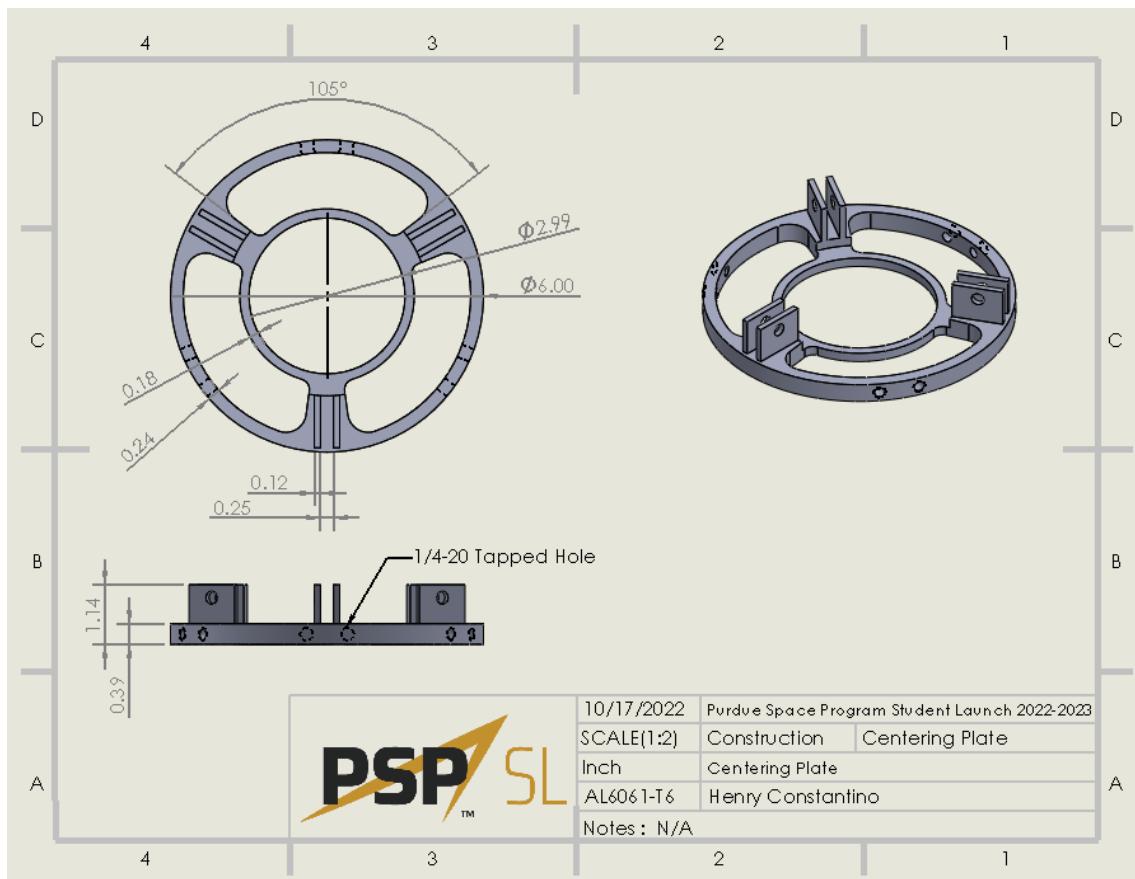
Technical Drawing for Centering Plate
